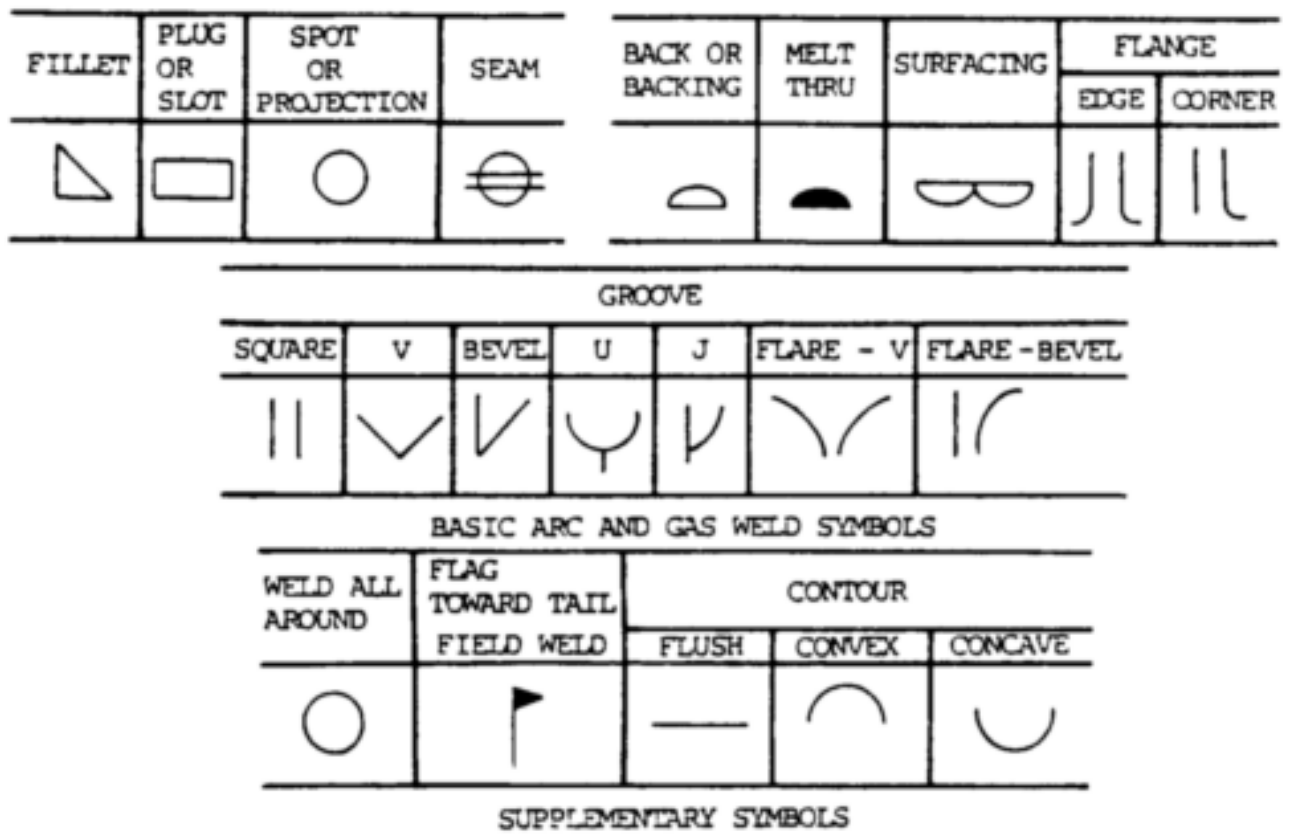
Basic and supplementary arc and gas weld symbols.
